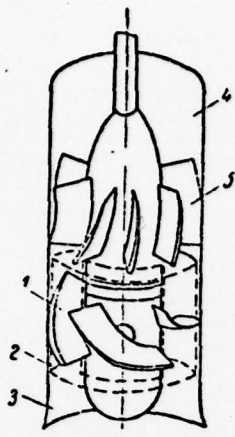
Diagram of an axial pump. 1) Rotor wheel; 2) Casing; 3) Intake; 4) Outlet; 5) Return-circuit rig.
